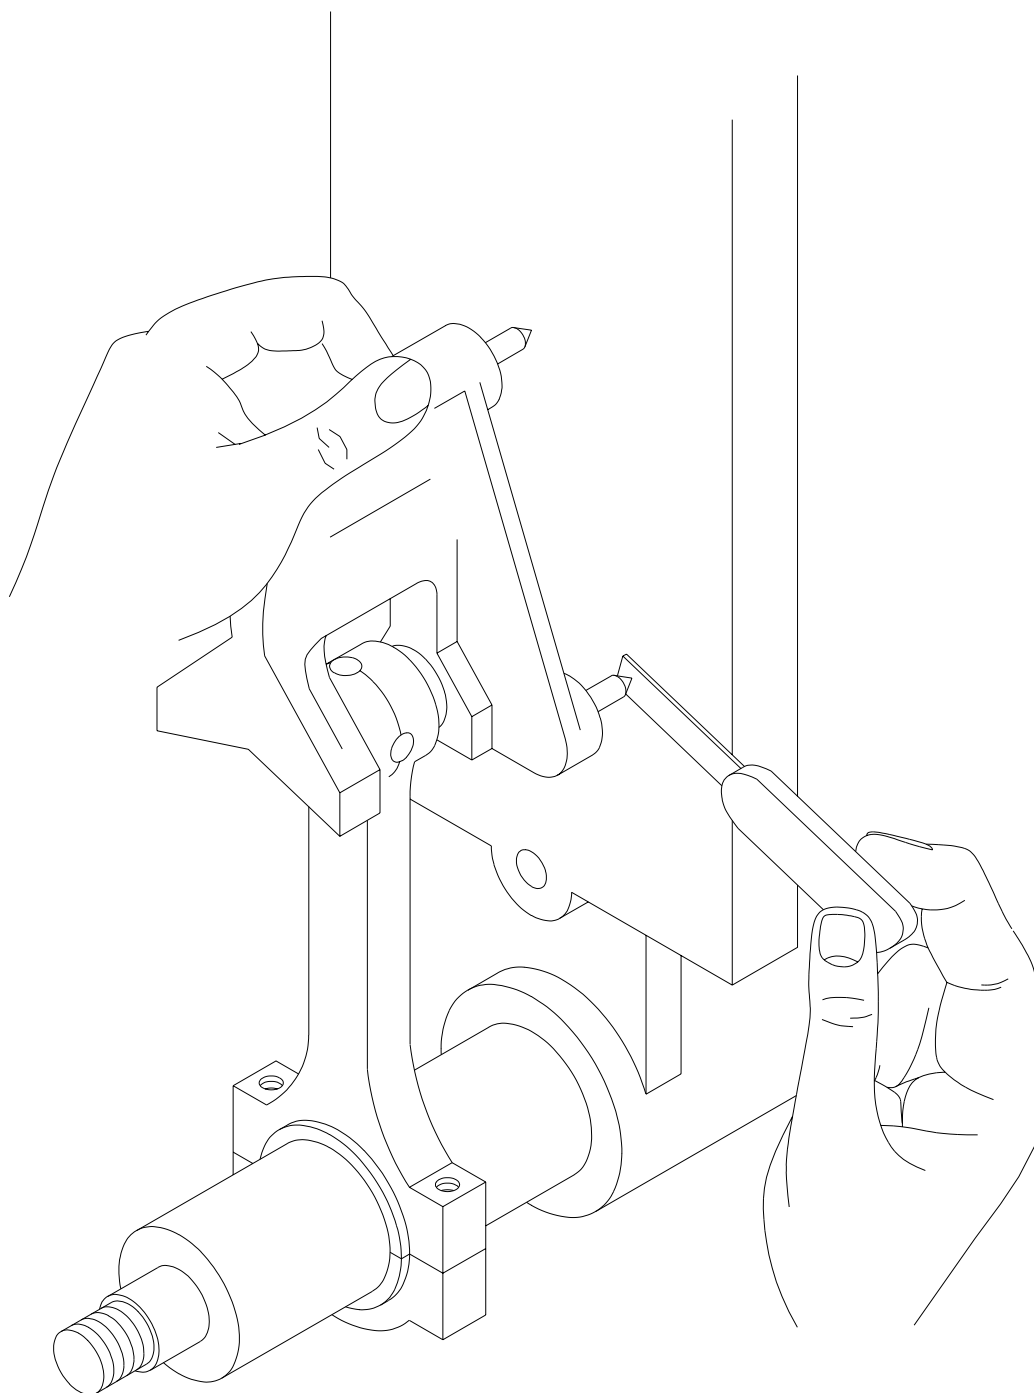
Connecting Rod (Sheet 2 of 4)
